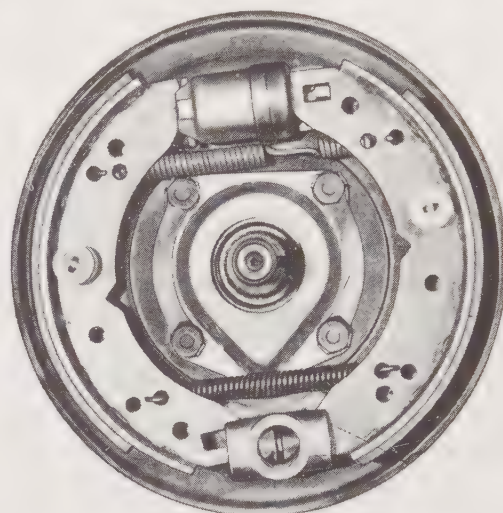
4 Rear brake with drum removed. Operating cylinder is at top, adjuster at bottom. Note positioning of pull-off springs.
